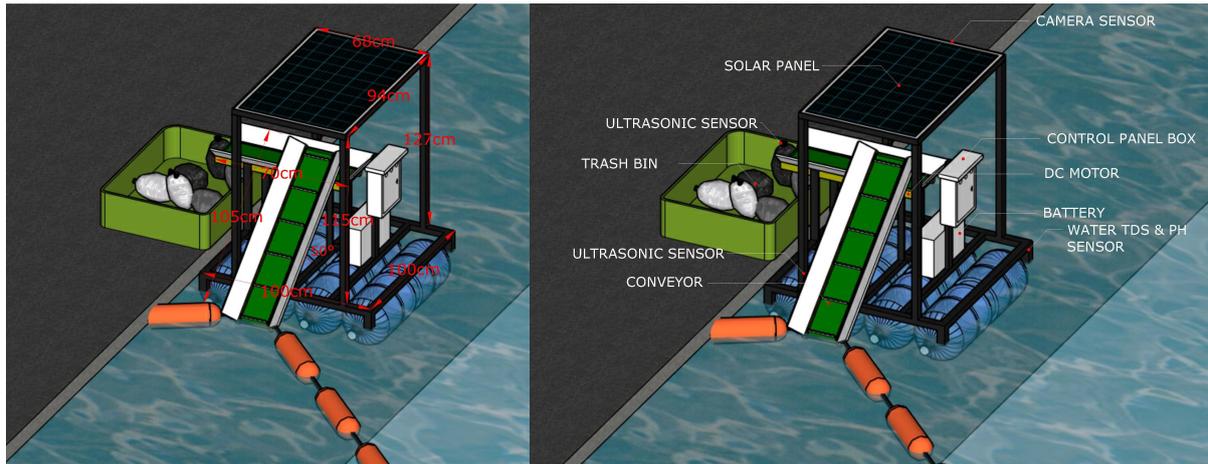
Mechanical Design and Dimensions of the SIPANDU
